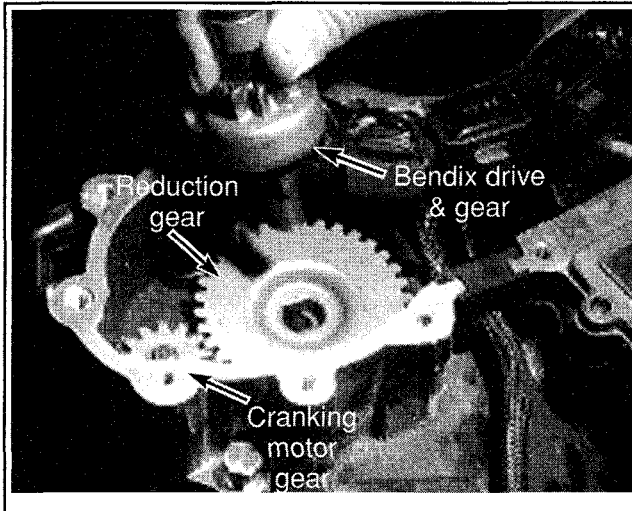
Typical mounting of a cranking motor-with gear reduction drive-used on large V6 or V8 powerheads. In this case, the gear reduction is housed in an integral part of the crankcase casting. Another gear reduction model has the gear reduction housed in a separate casting bolted to the cranking motor
